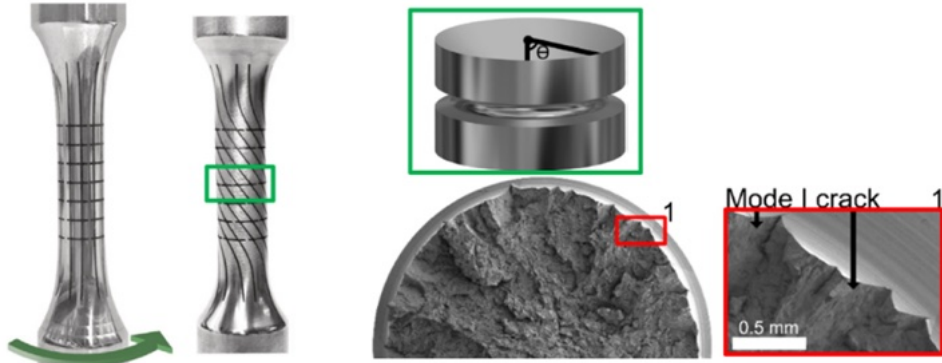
The pre-deformation of test bars, a notch machined in the middle section of the test bar, and the fracture surface after torsion fatigue testing (shear loading).
